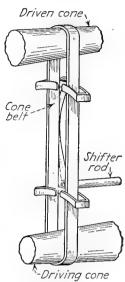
These speed cones are mounted at any convenient distance apart and connected by a belt, whose outside edges consist of an envelope of tough, flexible, wear-resisting rubberized fabric built to withstand the wear caused by the belt edge traveling at a slightly different velocity from the part of the cone in actual contact. Speed ratio changed by sliding the belt longitudinally.
